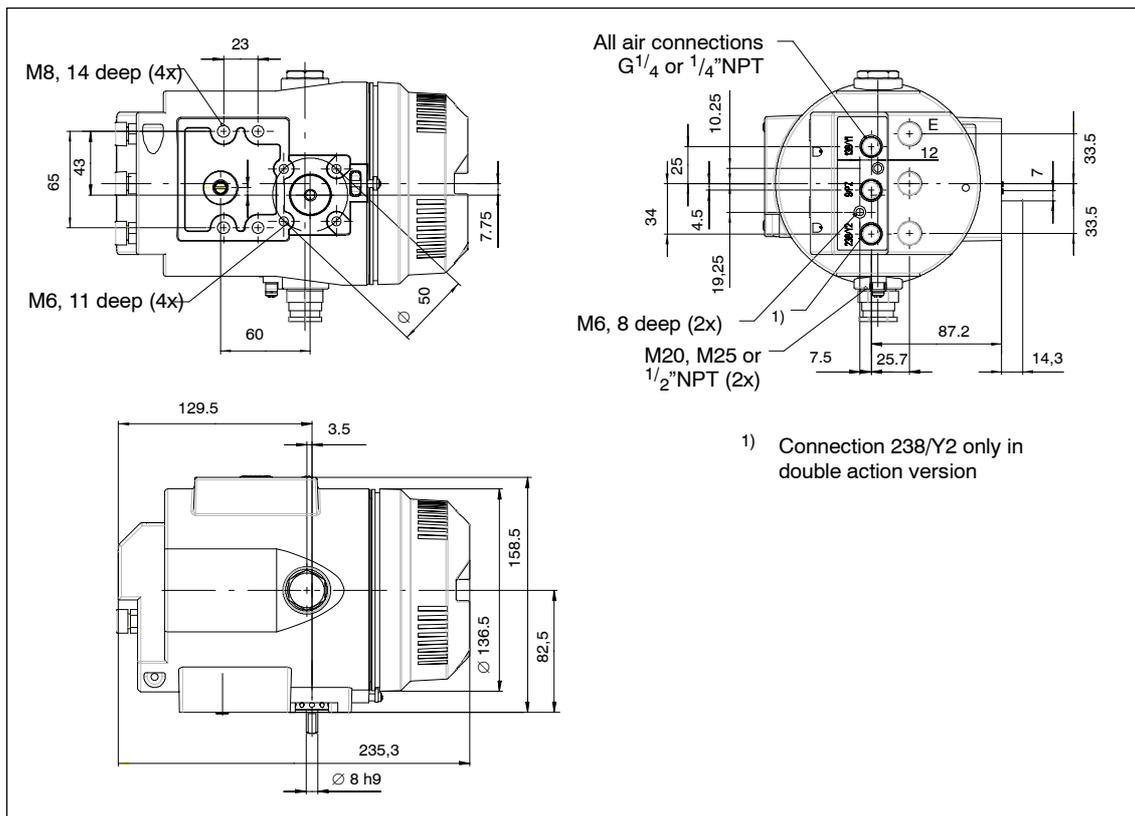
Dimensional drawing for positioner with metal housing in explosion proof version 6DR5x5
